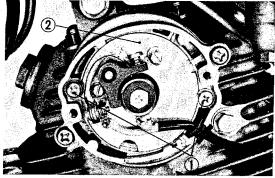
① Breaker arm retaining screws ② Adjusting position
